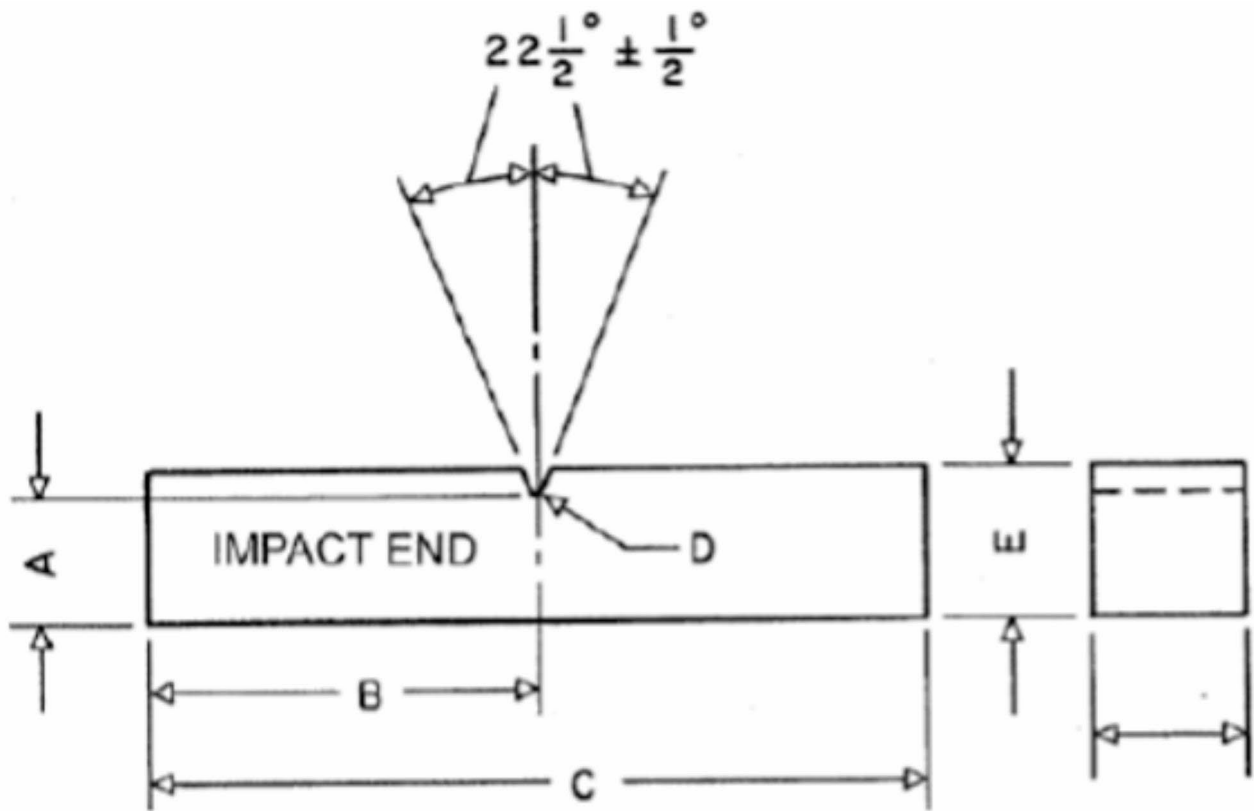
Dimensions of Impact strength as per ASTM D256.
